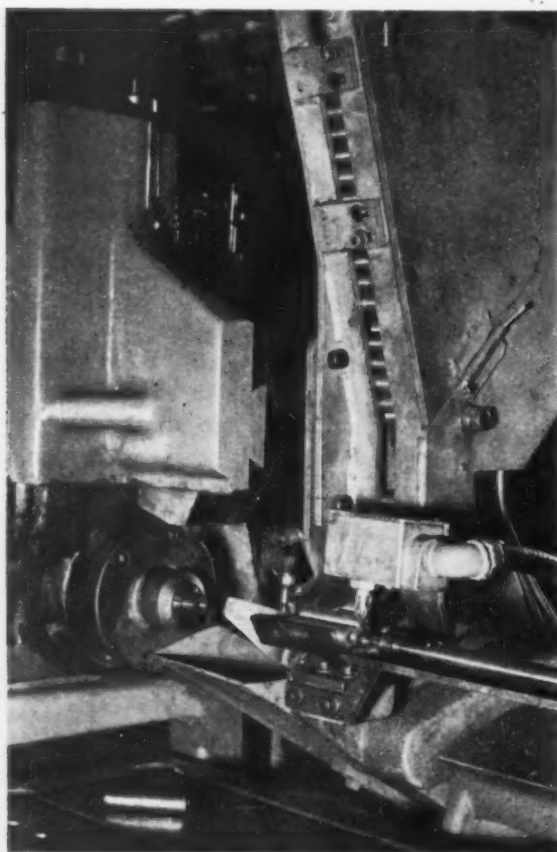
Single-spindle lathes with automatic hopper feed, air chucks and tools, each cut off, face and chamfer the second end of 720 valve guide bushings an hour.
